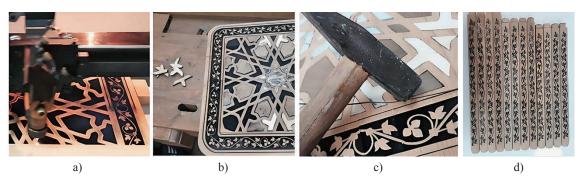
a) CNC laser tabletop engraving step, b) CNC laser tabletop table inlay step, c) CNC laser tabletop table Filigree (wire Inlay) step, d) CNC laser table stand leg processing
